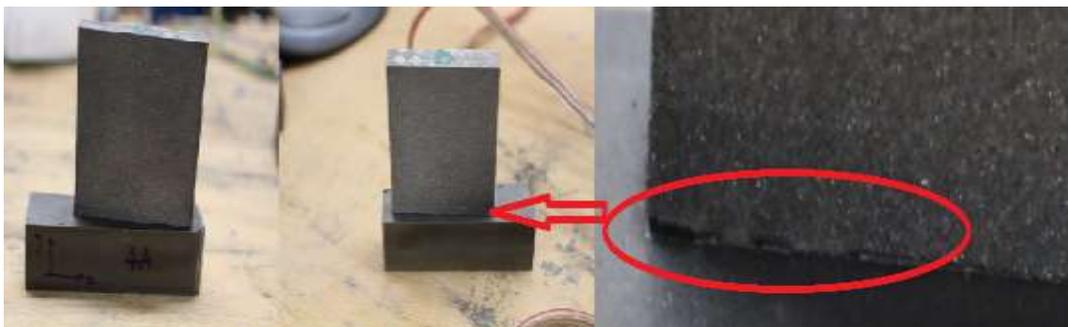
specimen 4 showing lifting of the specimen from the base plate at one side
